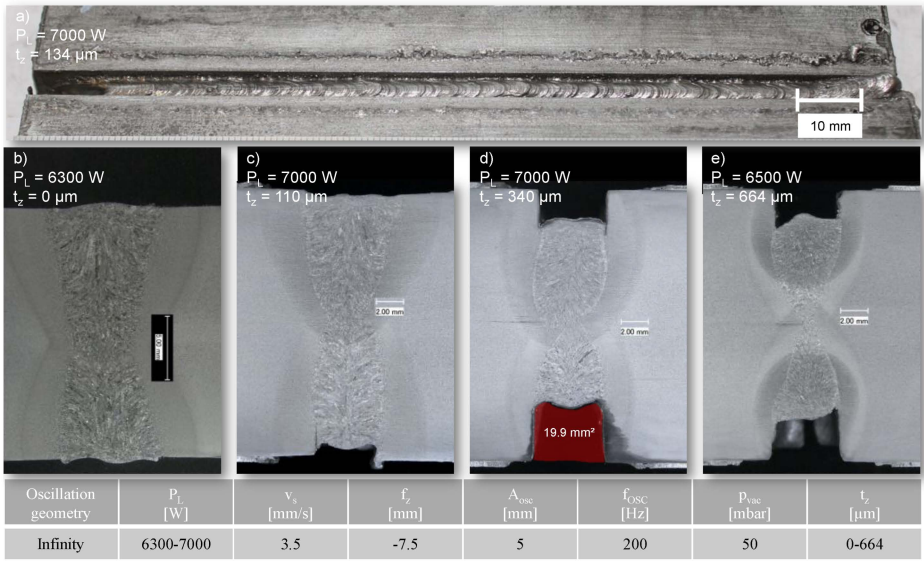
Welding parameters and weld seams with infinity oscillation and macro-sections of the weld at various zinc layer thicknesses in the joining edge (a) weld seam (b) zinc removed with saw cut (c) flame cutting (d,e) milled edge preparation.
